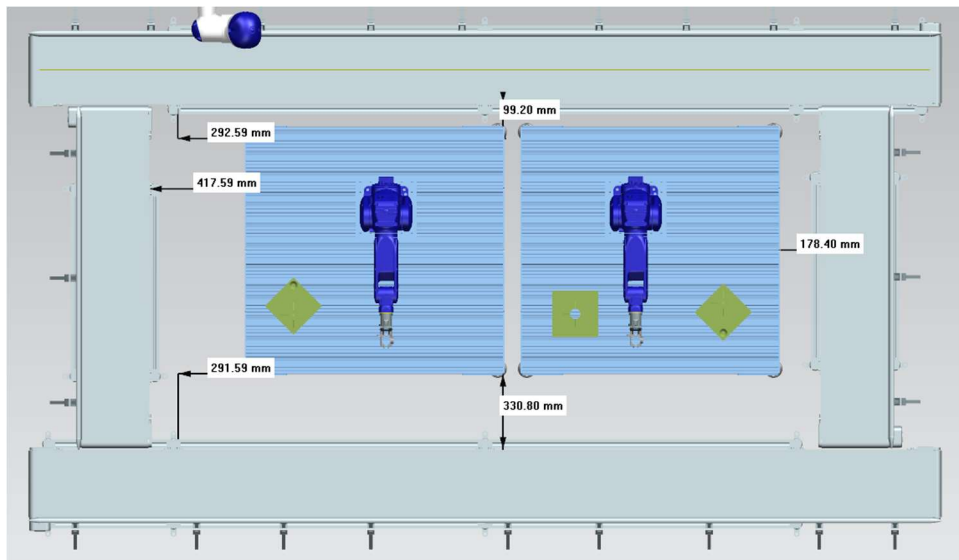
Conveyor Locating Dimensions from the DT Model
